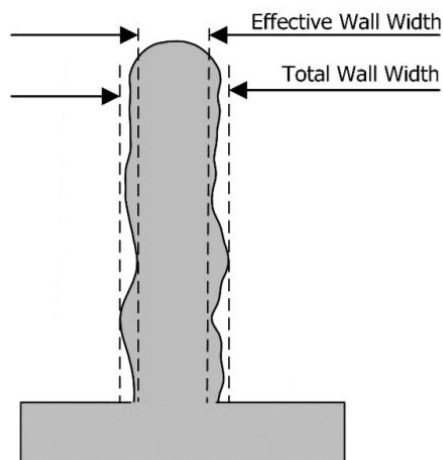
Schematic of WAAM wall highlighting the effective wall width and total wall width.
